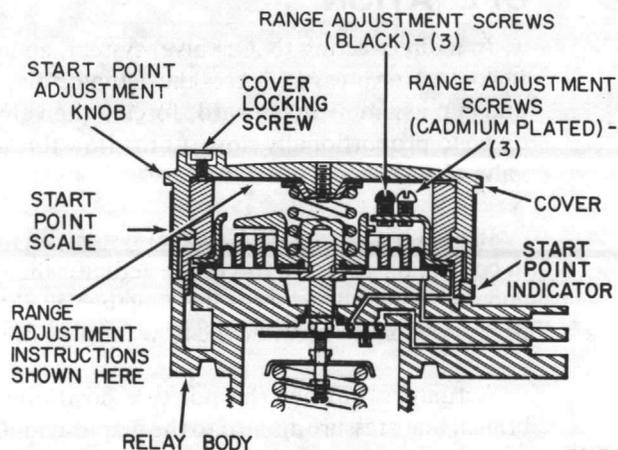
Adjustment Points of MO953/MP953A and B Gradutrol Relay.
